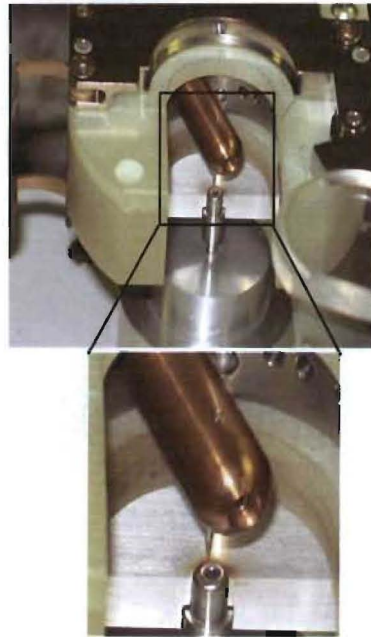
Specialized annulus tube weld head for use with AMI 307 welding power supply.
